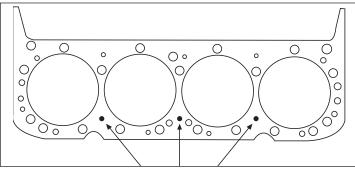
Steam Hole Locations (400 C.I.D. Engines ONLY)
